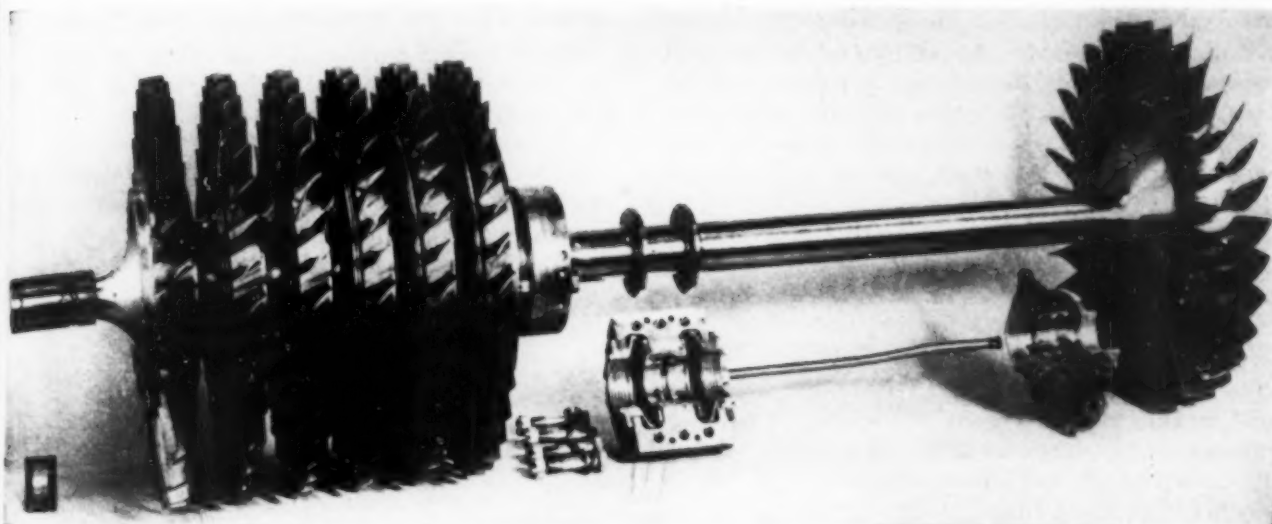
Rotor Assembly and Bearing Segments of 19-B Turbine. Turbine shaft and disk is 19% nickel, 9% chromium stainless plus tungsten and molybdenum;
